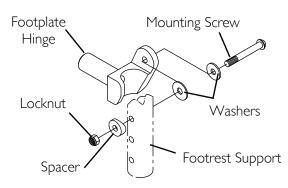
Installing Adjustable Angle Flip-up Footplate Hinge
